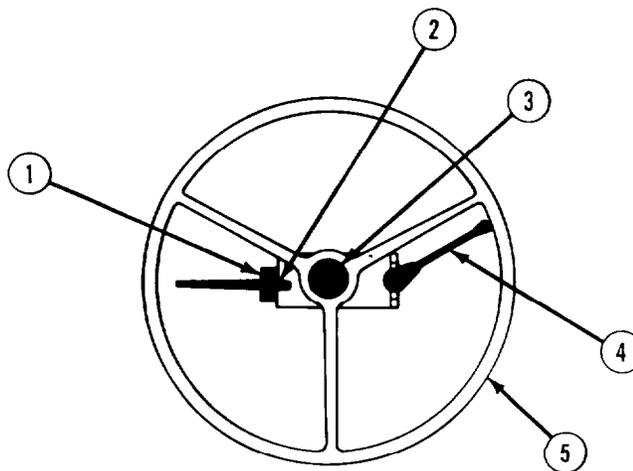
Steering Wheel and Column-mounted Controls. TA 236653
